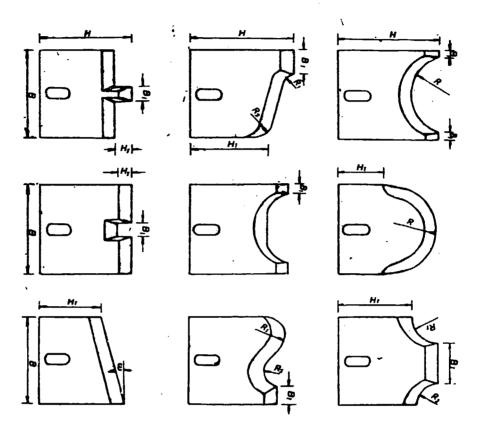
Some examples of profiled knives. Profiles made on a four sided planer are shown in fig. 25.
